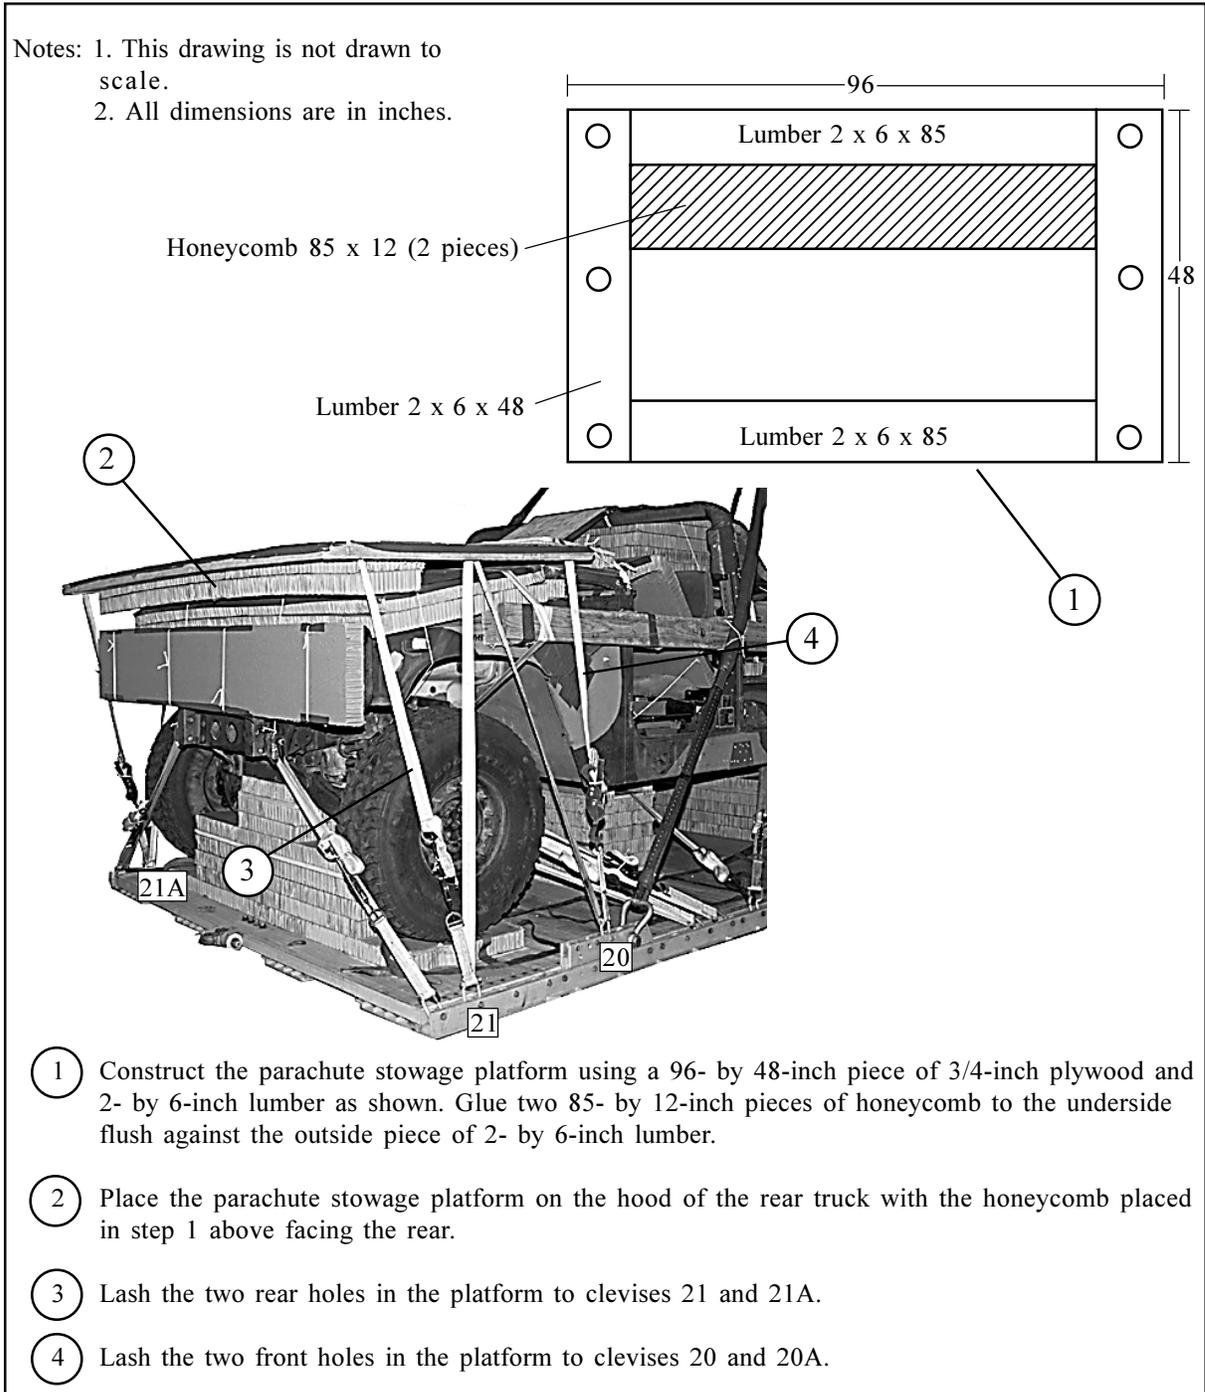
Parachute Stowage Platform Constructed and Installed
